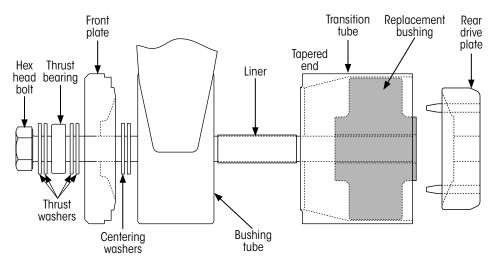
Assembling narrow bushing tool for TF III bushing installation
